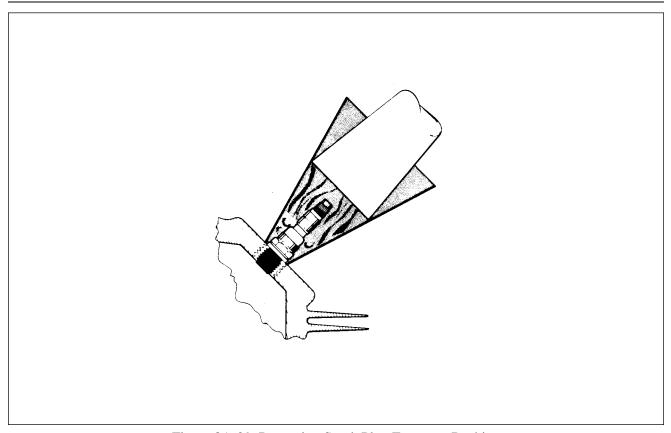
A-29. Removing Spark Plug Frozen to Bushing
